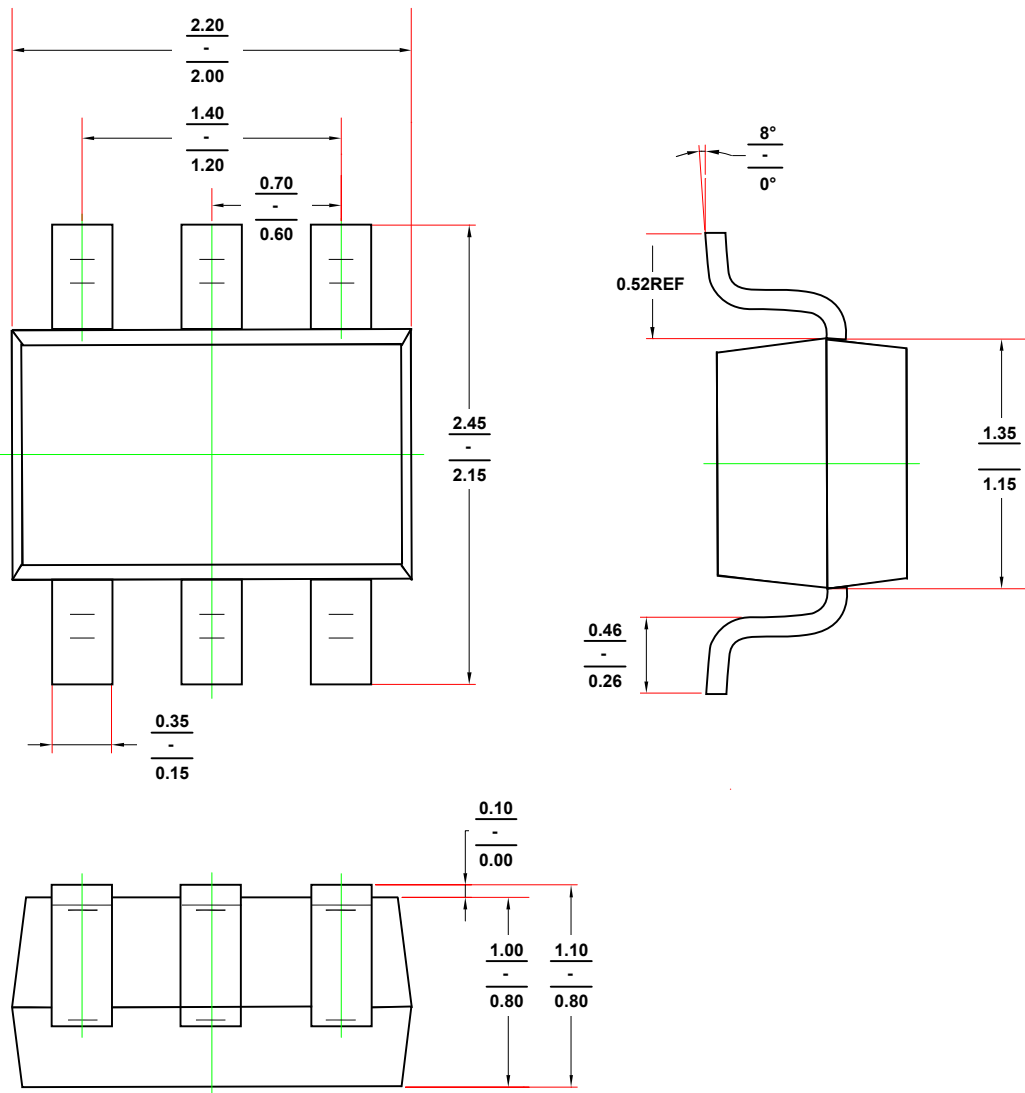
6-lead SC70 Package Dimensions Shown in Millimeters
